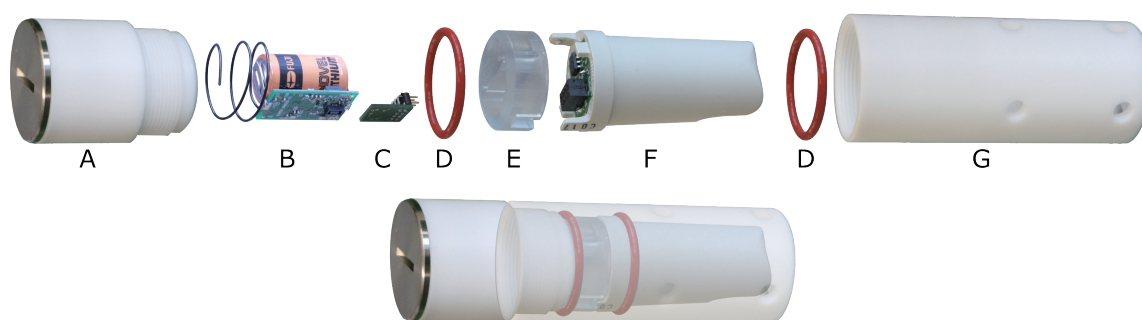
(Color online) (top) Disassembled and (bottom) assembled views of the probe. A shows the electronics compartment. B shows the main PCB with an MCU, a transmitter, a temperature sensor, an accelerometer, an RF antenna, and a battery. C shows the pH sensor interface PCB with reference voltage generation. D shows o-rings. E shows a 3D-printed washer to accommodate the pH sensor assembly. F shows the pH and sensor assembly. G shows the pH sensing compartment with 10 5-mm-diameter access holes.
